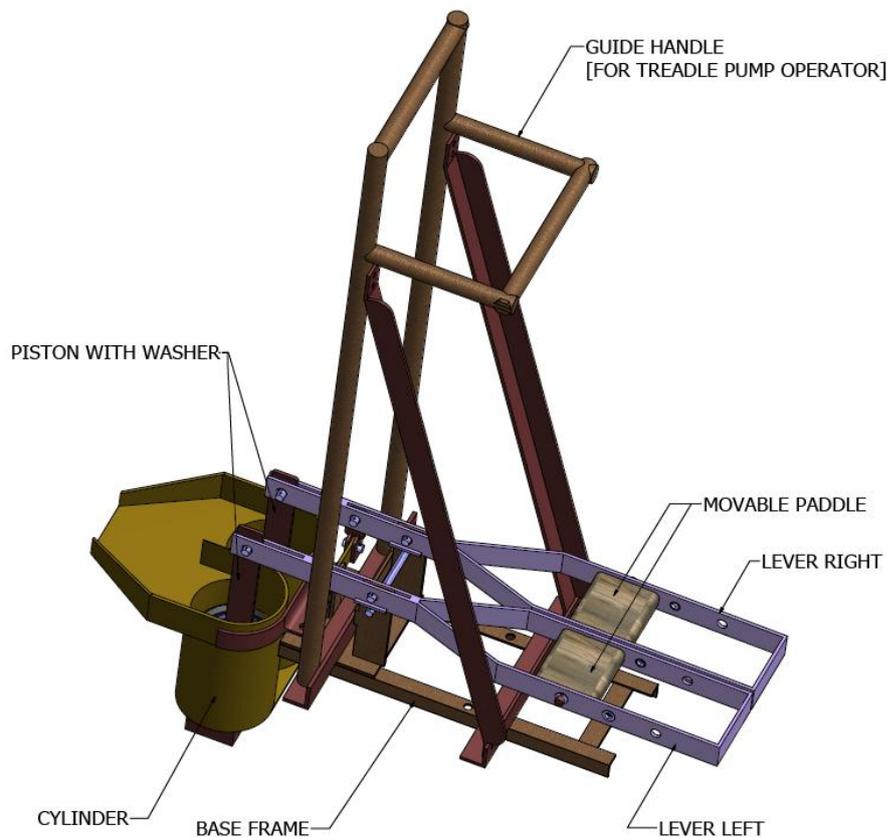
CAD model of improved Treadle Pump using Autodesk Inventor 2012.
